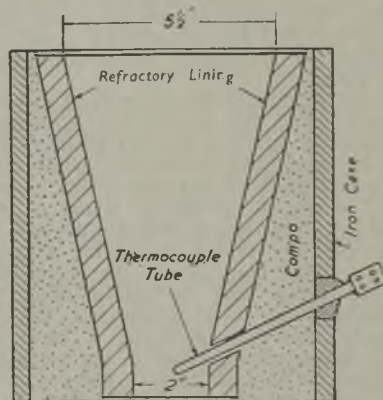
SECTION OF RUNNER-BOX ADAPTED TO TAKE THERMOCOUPLE.
